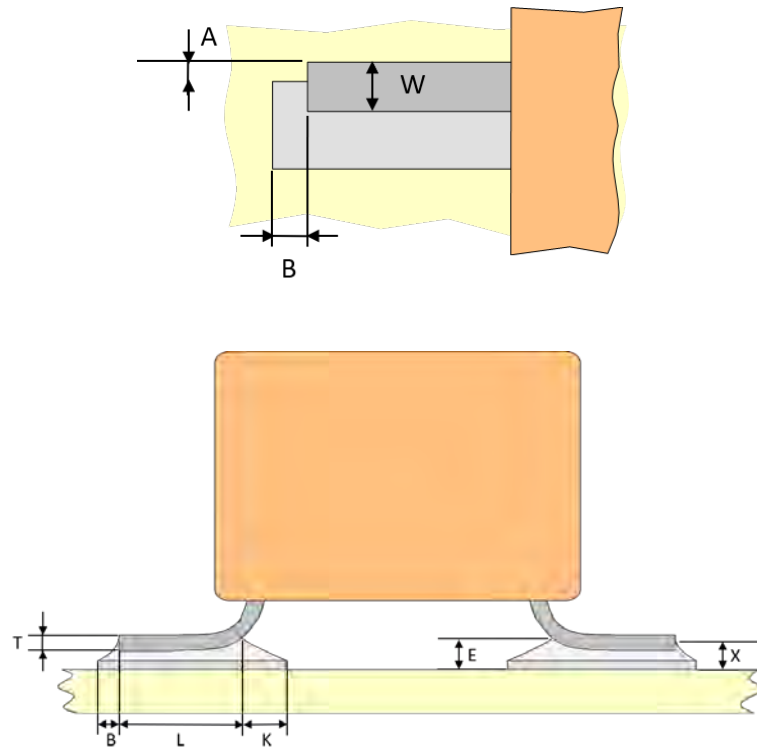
Mounting of stacked module components with leads protruding vertically from bottom
